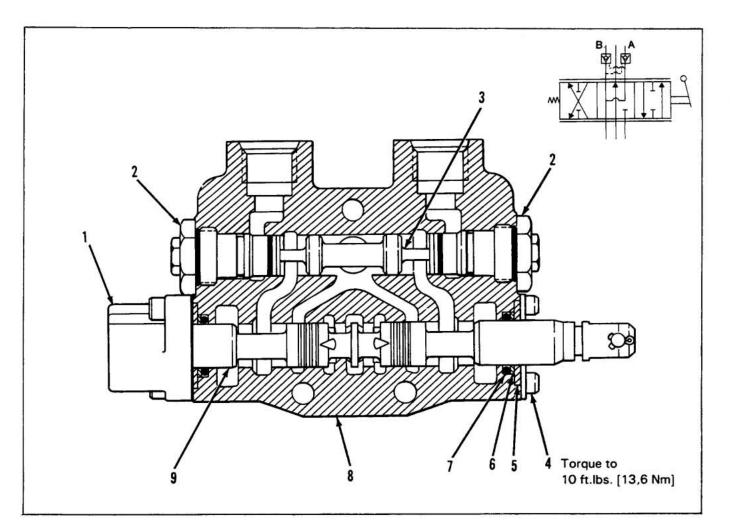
4-Way, 3-Position Lockout Valve Section.
